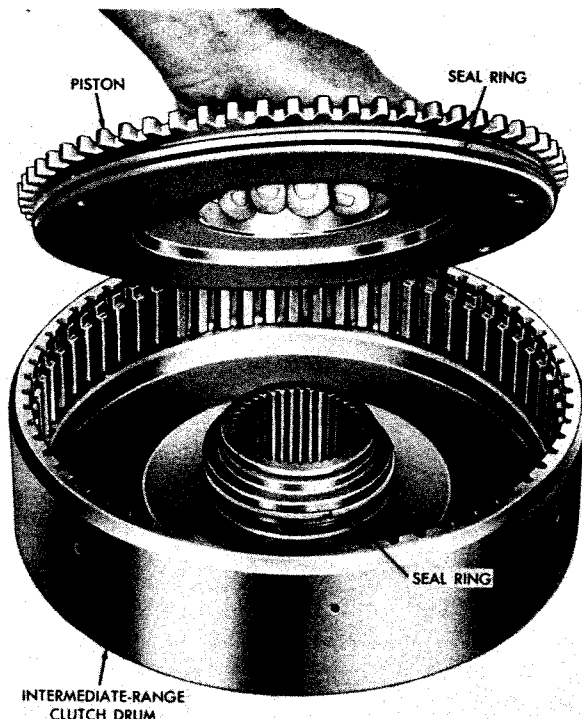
Removing (or installing) intermediate-range clutch piston assembly
